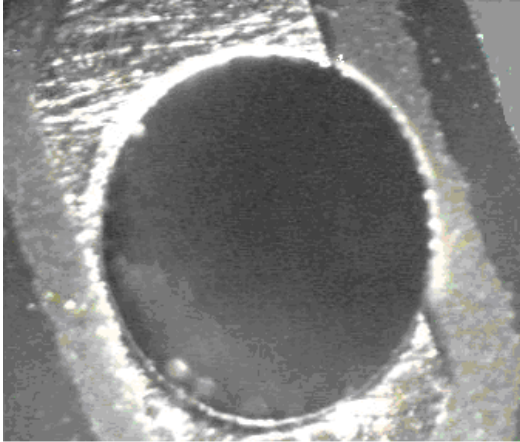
An Image of a Plated Through Hole on a Printed Circuit Board Showing Damage to the Conductor around the Hole
